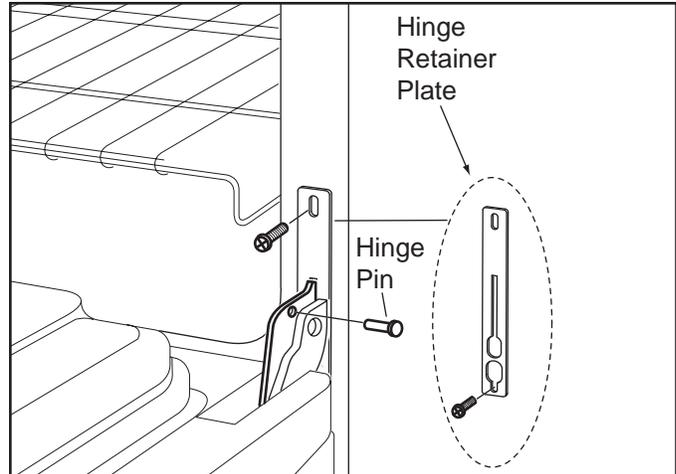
Hinge pin and retainer plate (SWS 17000000)
